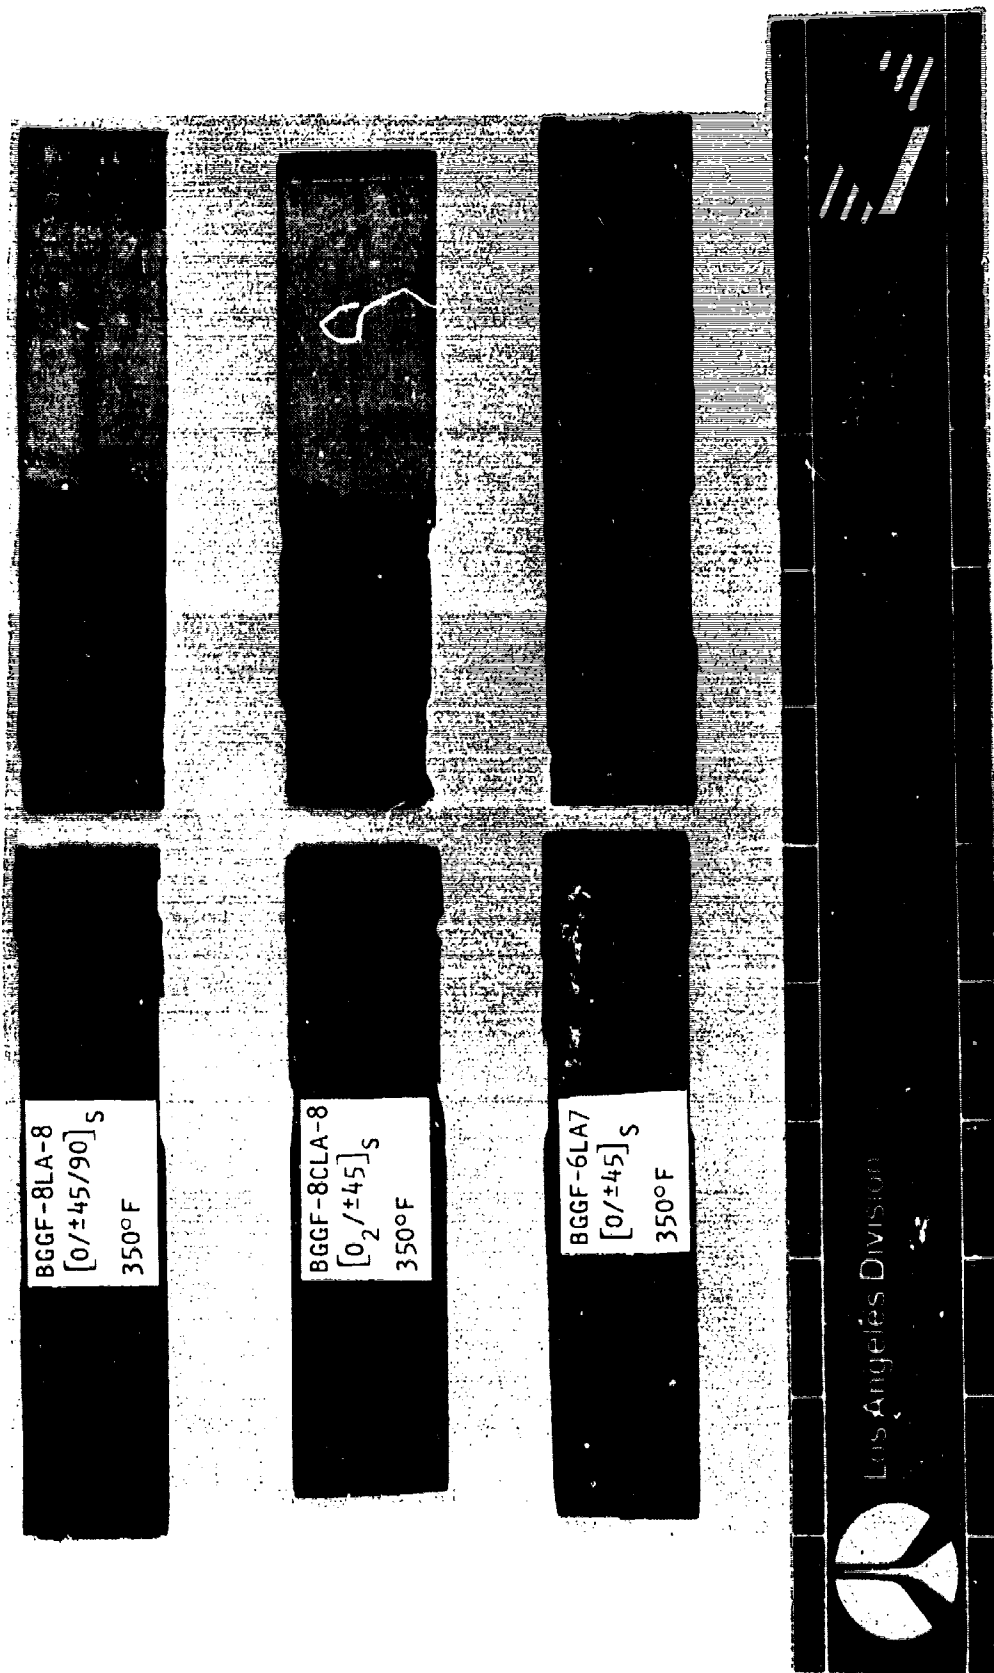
Typical Graphite/Epoxy to Graphite/Epoxy Bonded Single-Lap Joint Tension Fatigue Specimens, 350°F (Type AS/3002 - Batch) Metlbond 329-7 Adhesive
